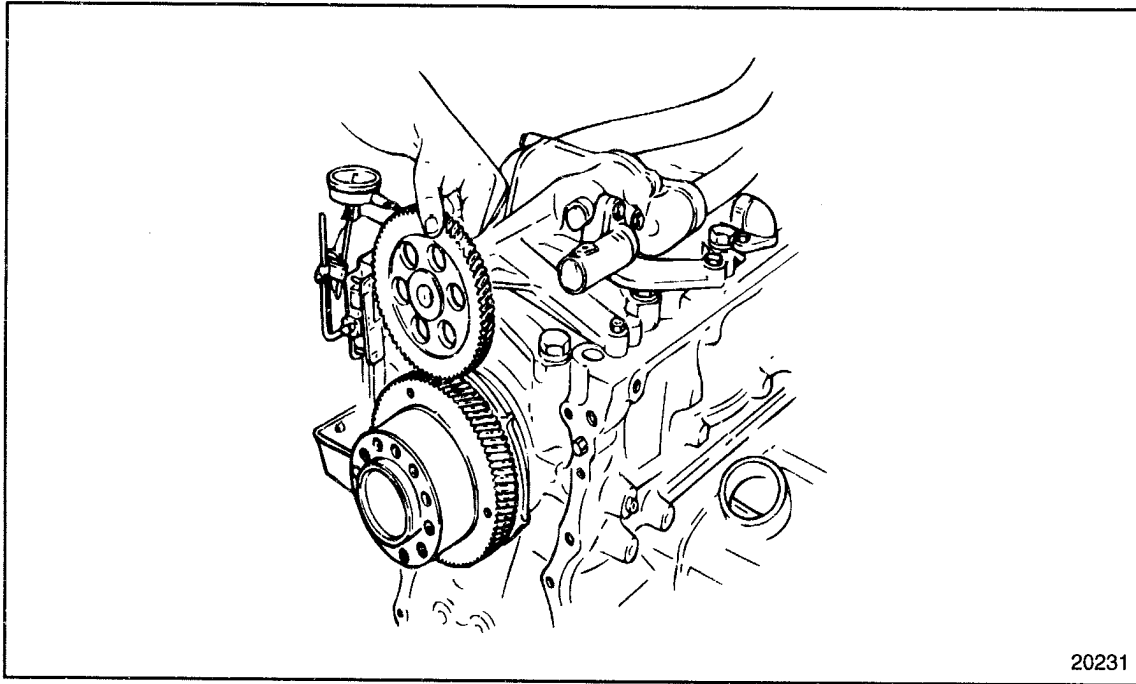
Crankshaft Timing Gear-to-Oil Drive Gear Lash Measurement
